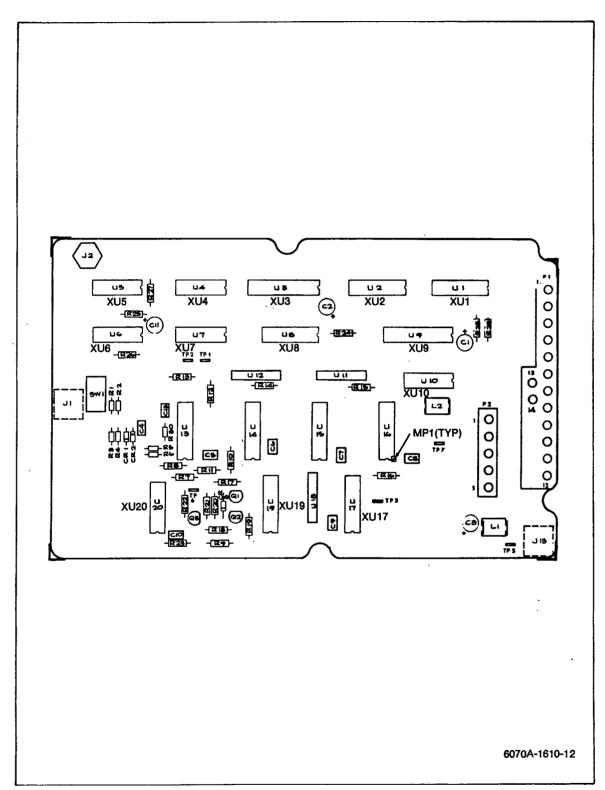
A3A4 N/1 Divider PCB Assembly
